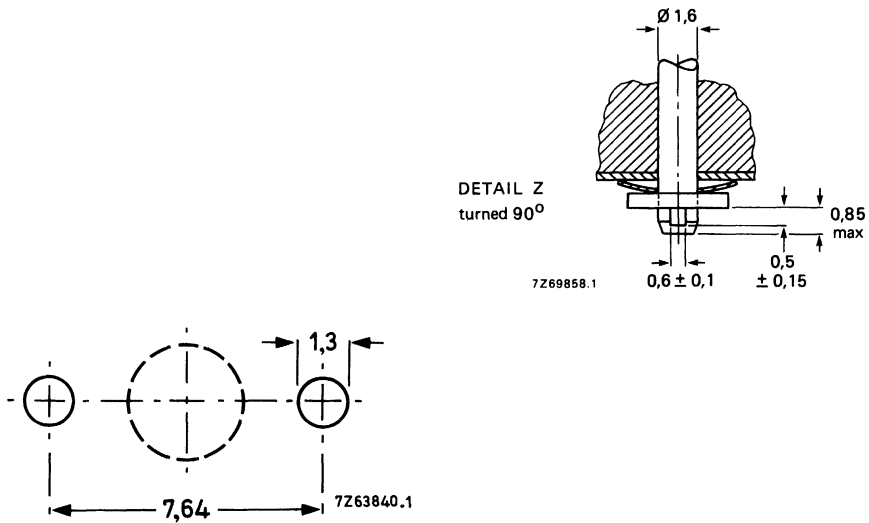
Hole pattern. The large hole is for bottom adjustment; the diameter is determined by user's requirements.
